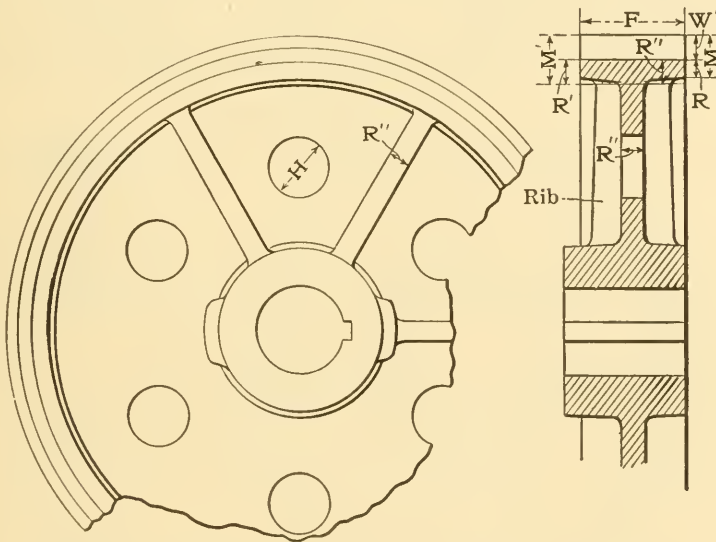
PLAN AND SECTION OF WEBBED SPUR GEAR.
